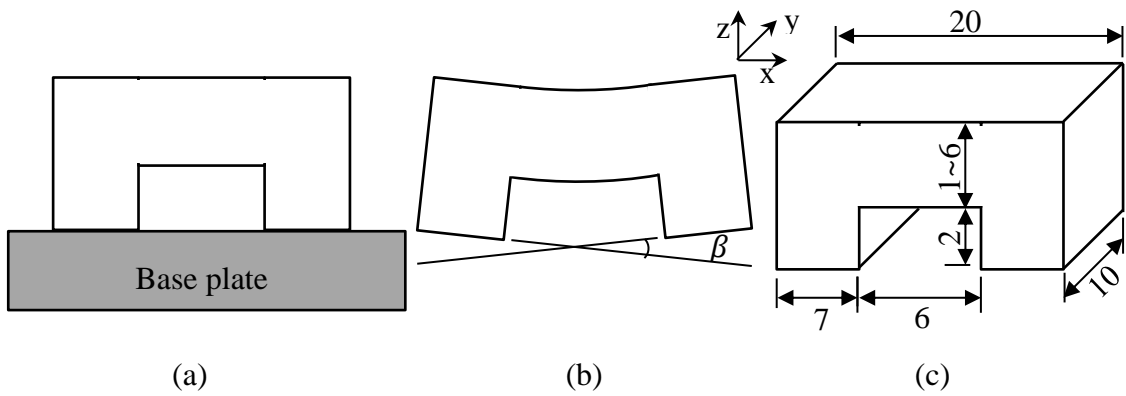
Schematic of the BCM method for identifying the residual stresses in the test parts. (a) Before, and (b) after removal from base plate. (c) Dimensions of the test parts [mm].
